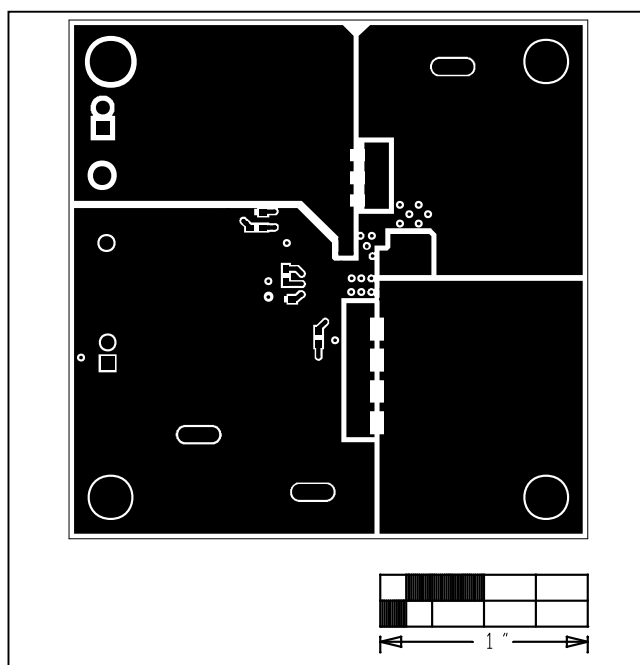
MAXM17543 EV Kit PCB Layout—Solder-Side
